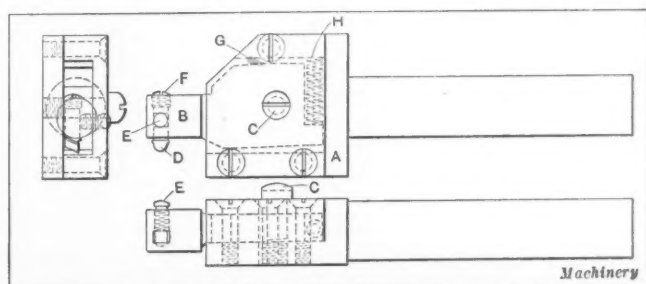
Internal Forming Tool carried in Turret of Screw Machine
